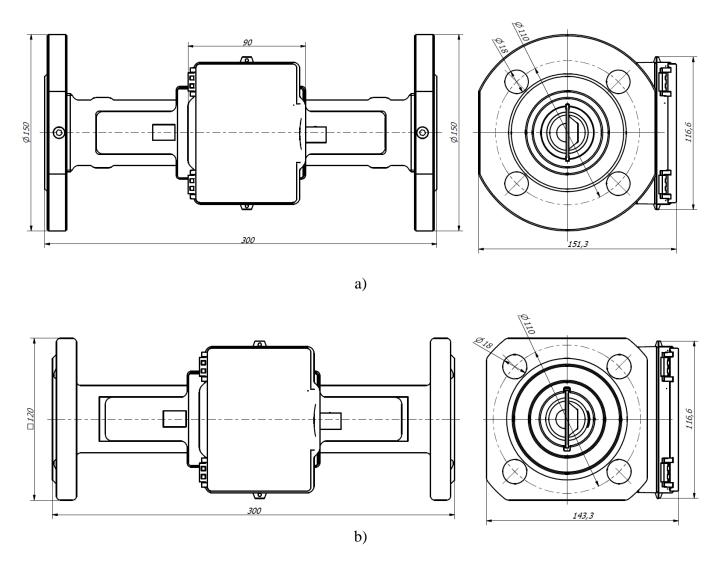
Flanged end connections DN40, mounting length L=300 mm (two design options)
